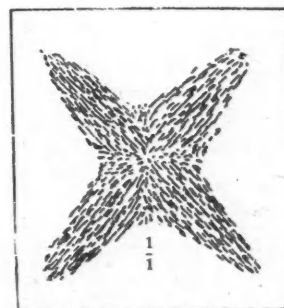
Steel bar cold-hammered on all four faces. Etched section.
